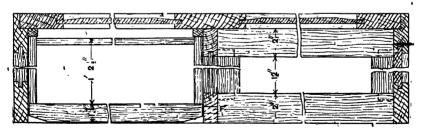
Enlarged Horizontal Section through Drawers of Sidebourd.
